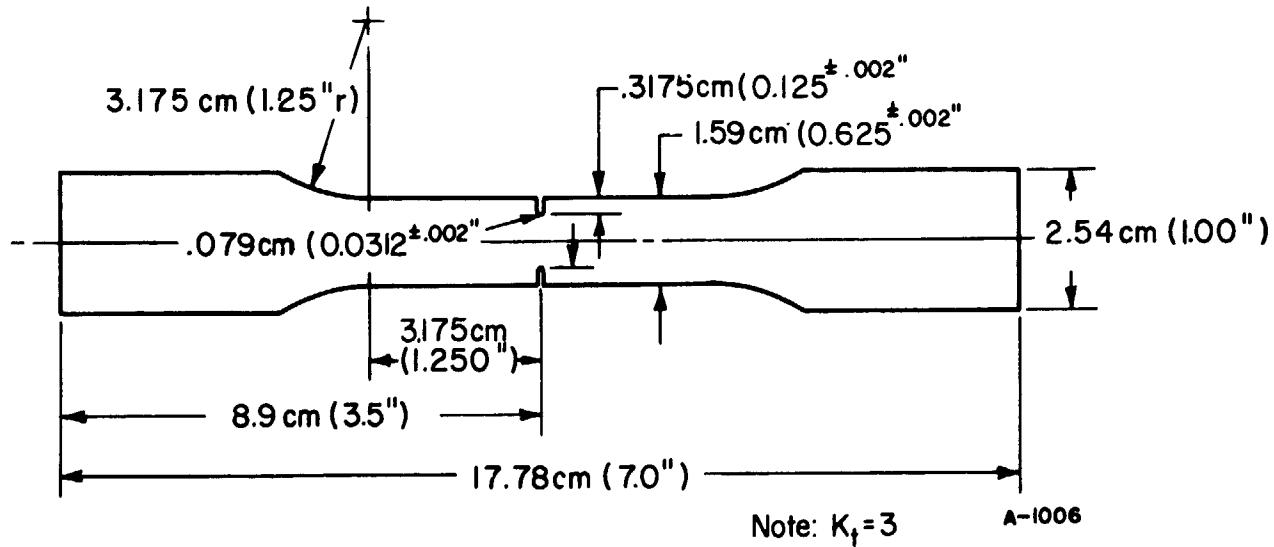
NOTCHED SHEET FATIGUE SPECIMEN
